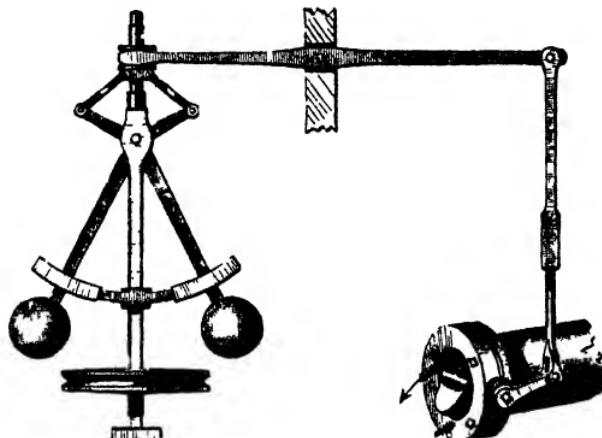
WATT'S GOVERNOR AND THROTTLE VALVE.
